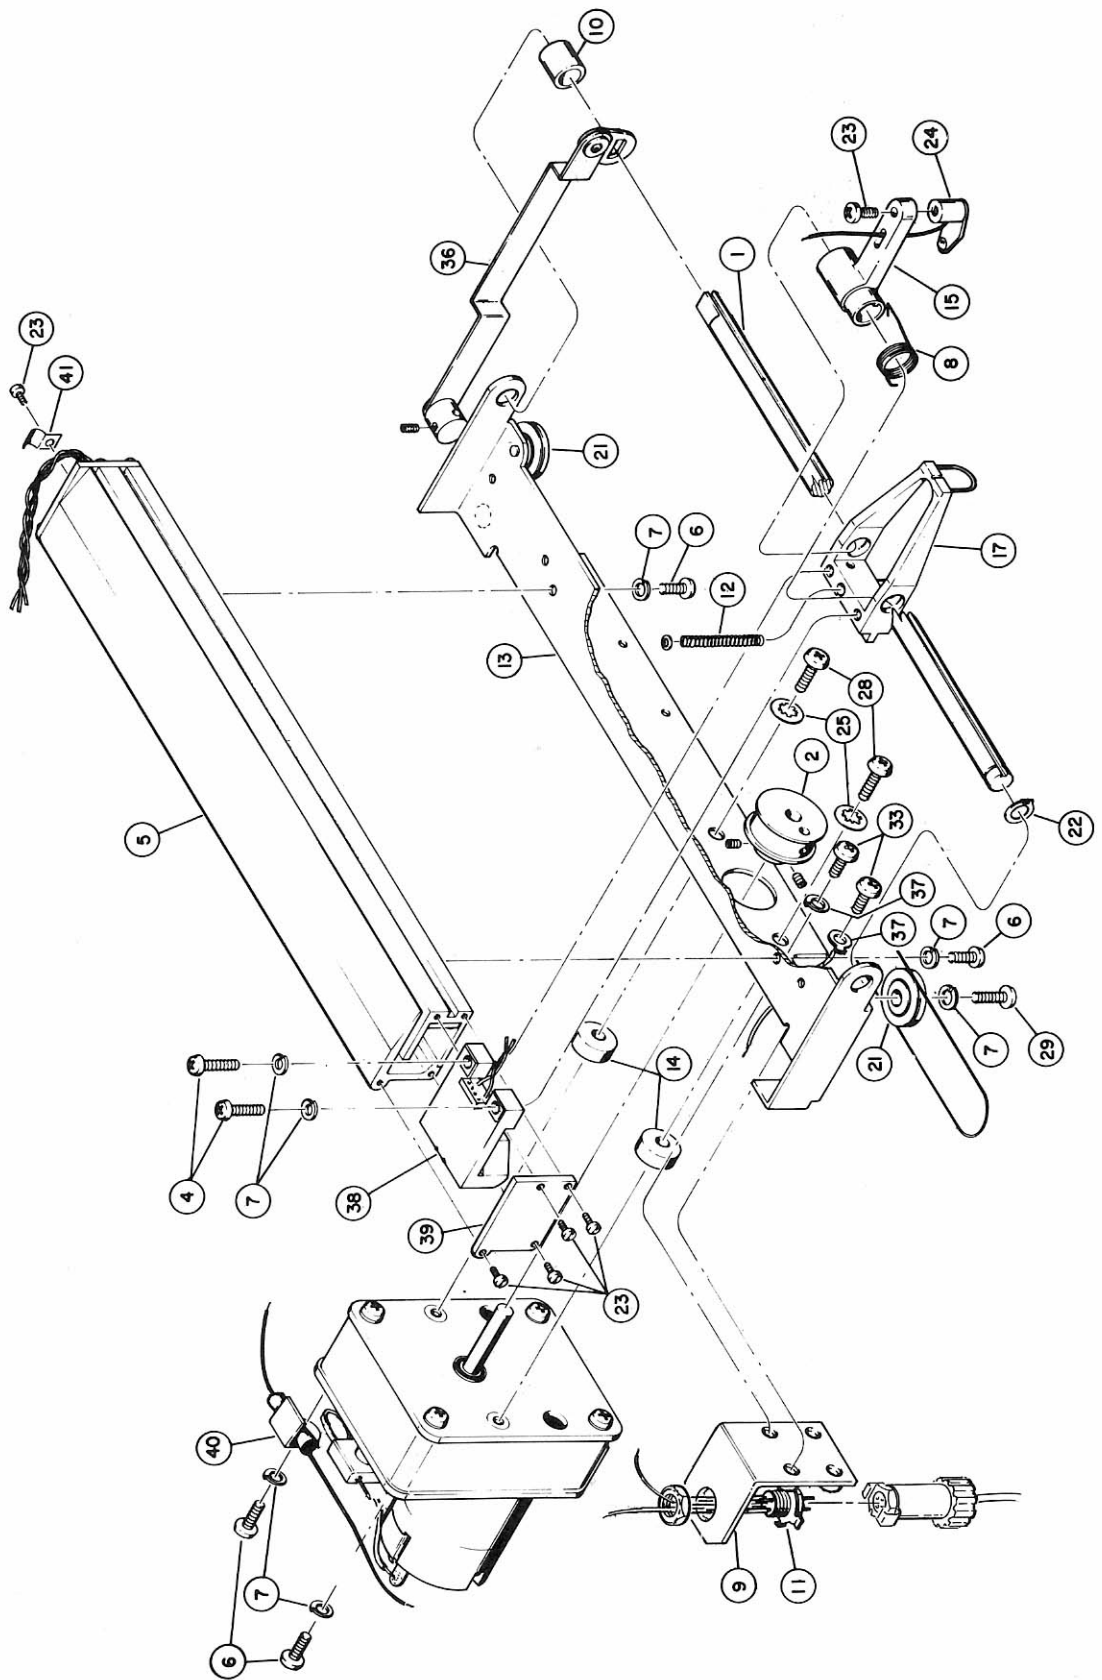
EXPLODED VIEW OF PEN CARRIAGE WITH ELECTRIC STYLUS AND PHOTO SLIDEWIRE (Sheet 1 of 2)
